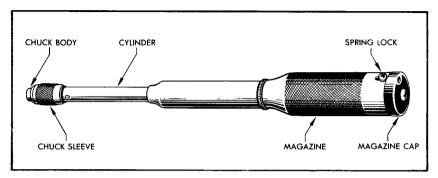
Miller Falls 185 Automatic Hand Drill
